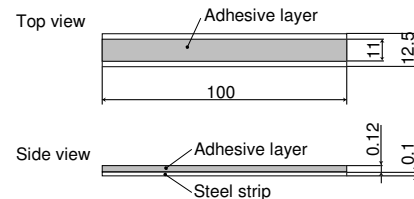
Dimensions of the adhesive on strip sample. All dimensions are in mm.
